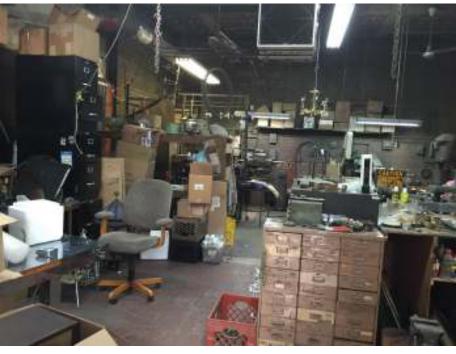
Interior view of the Artcraft Silversmith workshop located on the first floor.
